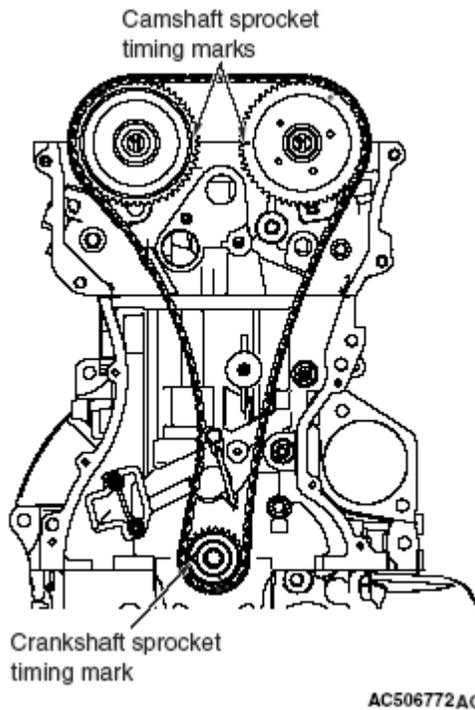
Identifying Camshaft Sprocket Timing Mark
